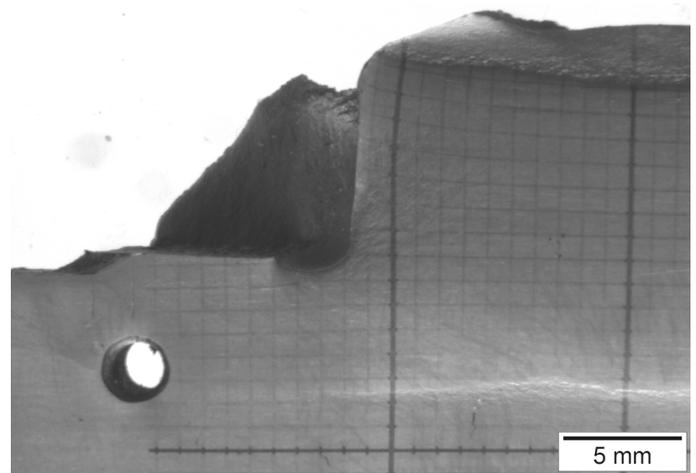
Image showing how the crack deviated from the seam weld into the HAZ.
